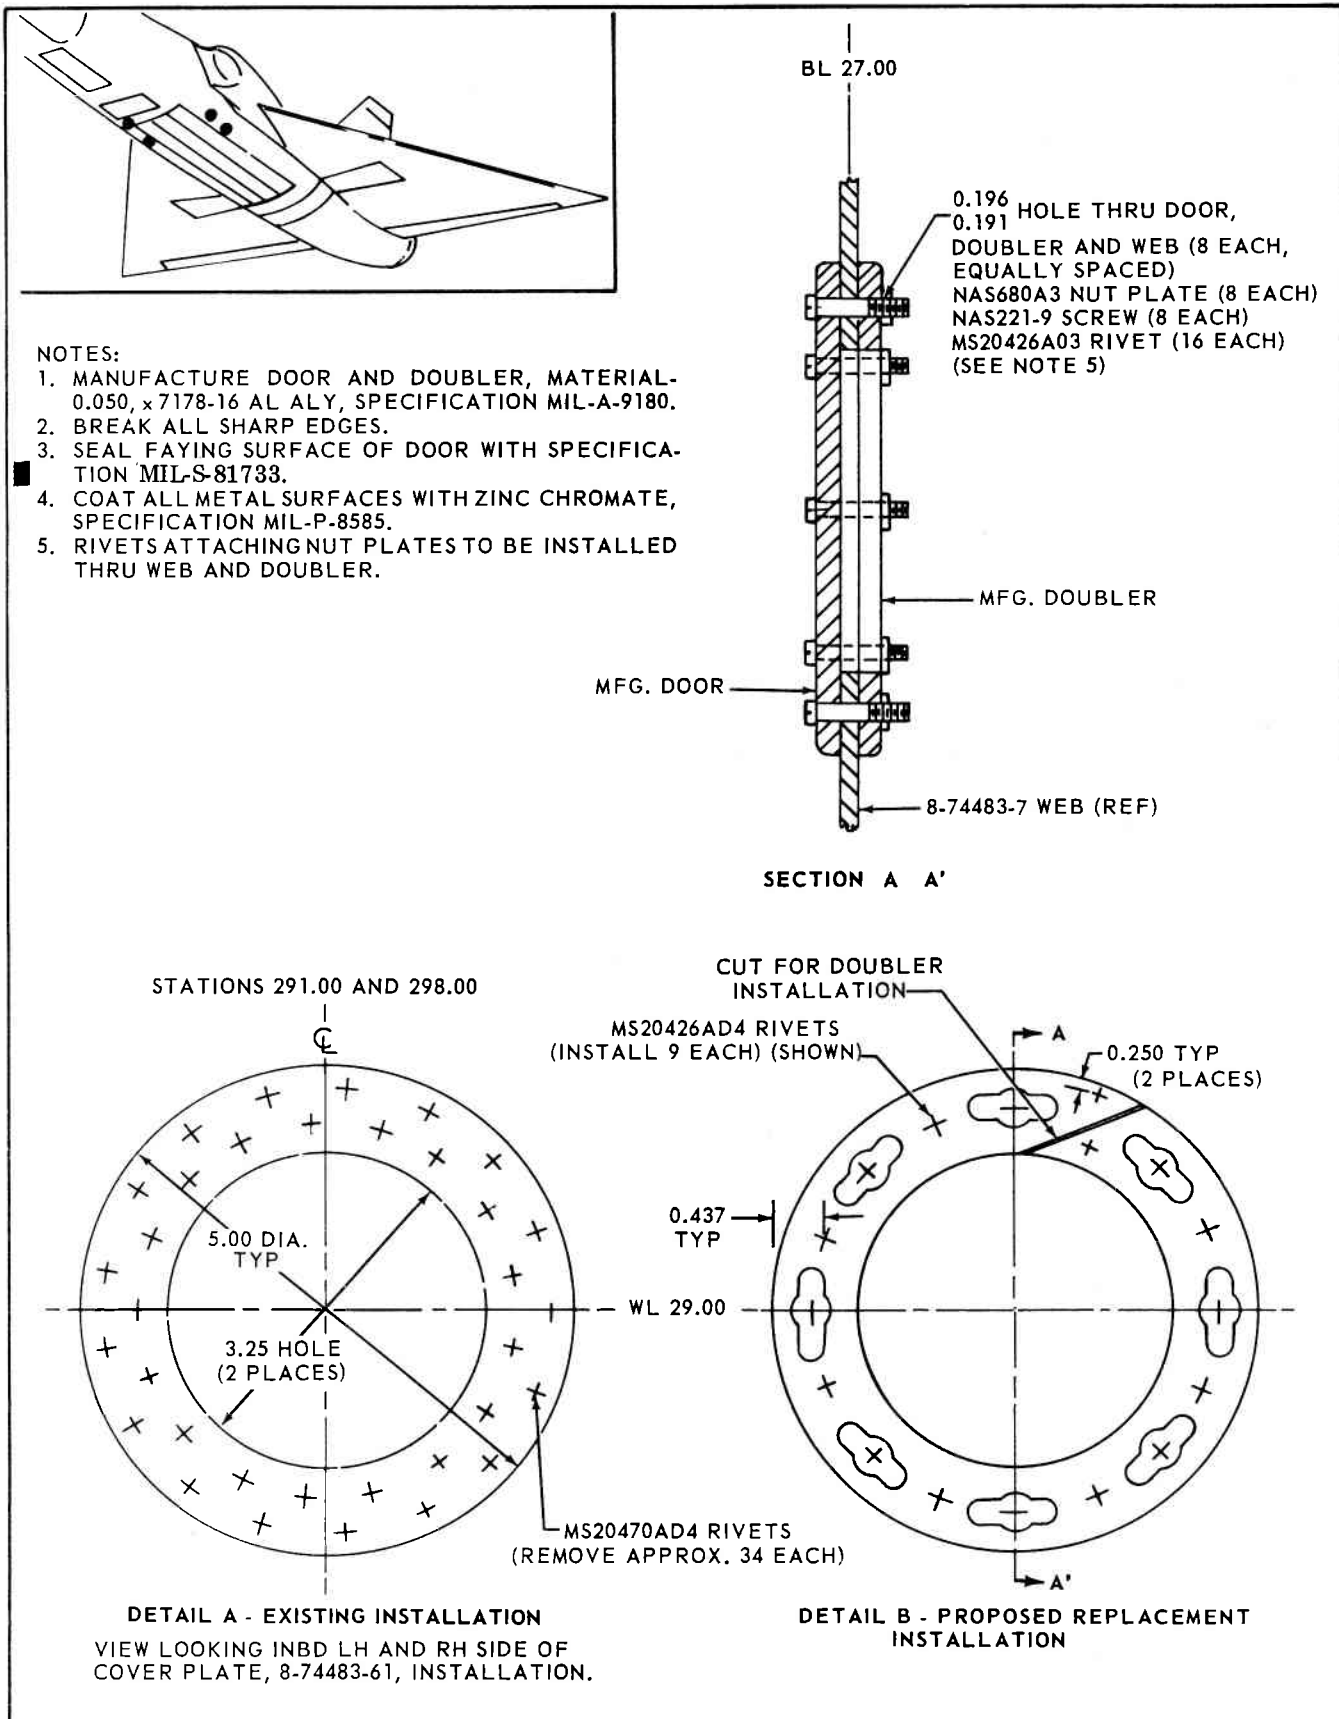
A. Missile Bay Area Cover Plate Installation and Replacement
